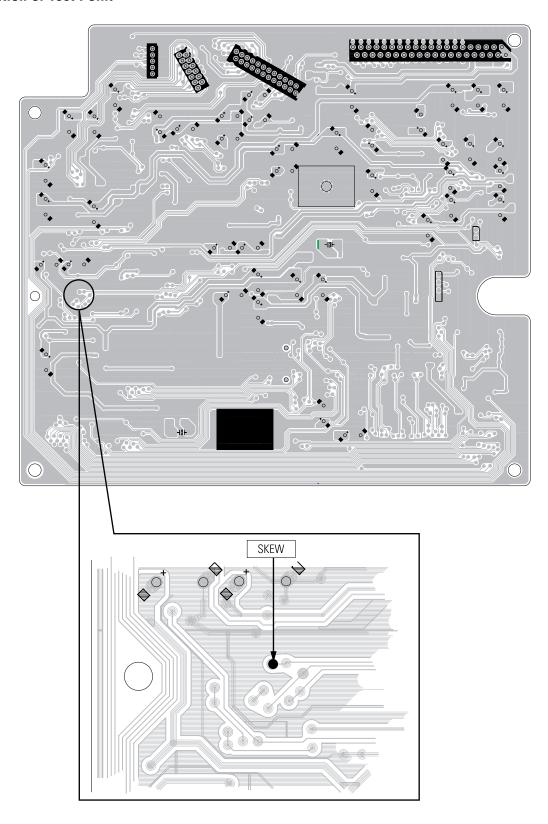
Location of test Point (DVD Main PCB - Bottom Side)
